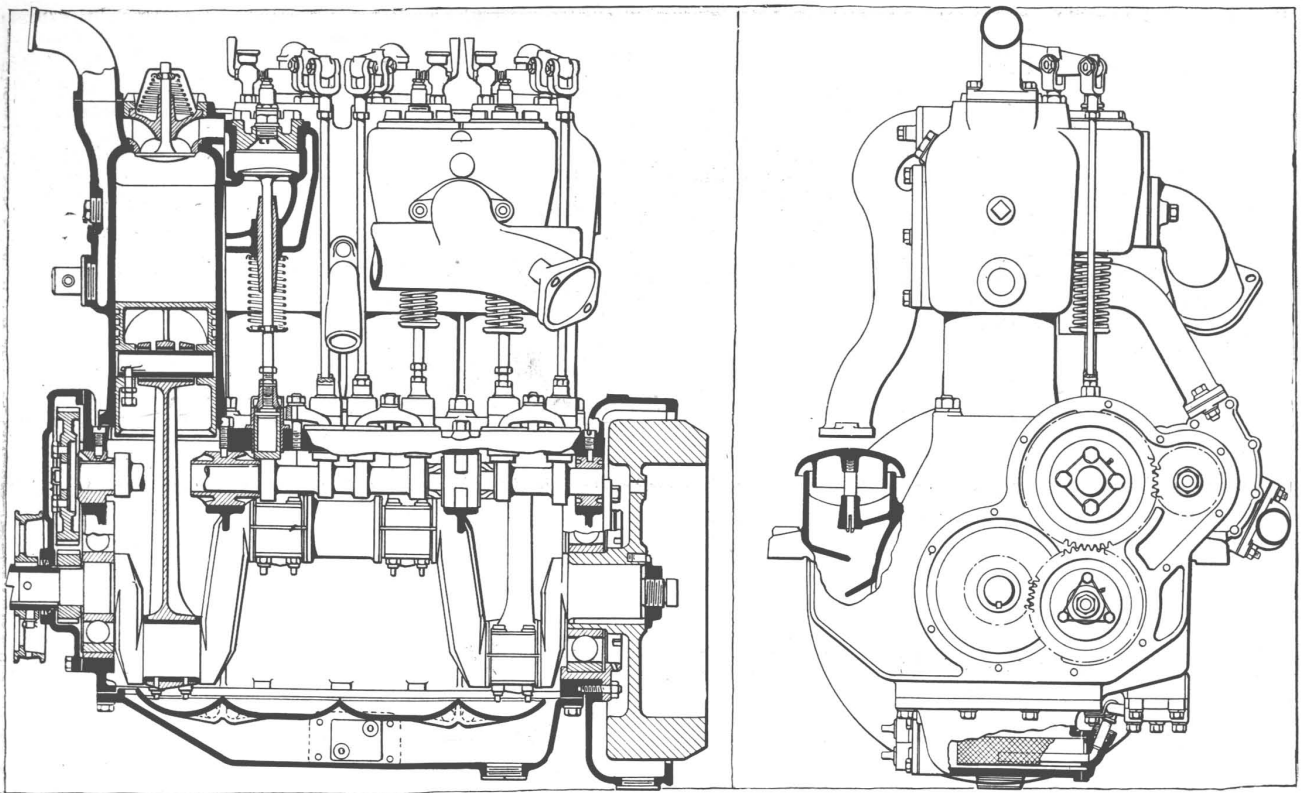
Sectional side and end views of the Chalmers 36 motor, showing many interesting details of construction. With the inlet valves in the heads and the exhaust valve on the sides the valves are unusually large; inlet valve springs, guides and stems are protected from dust and dirt by brass caps. Valve tappets and pushrods are adjustable, pistons have four compression rings; the crankshaft is mounted and has two large ball bearings; the flywheel is enclosed; oil reservoir detachable; the oil filler and breather very large, and all piping short and direct
